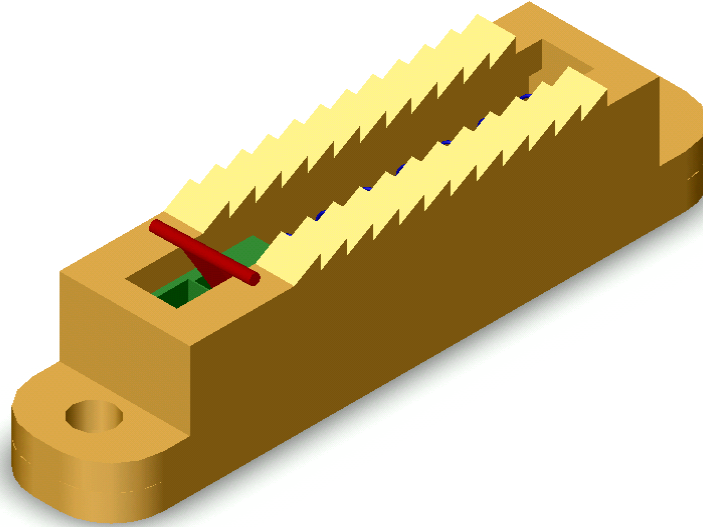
SolidWorks® Assembly of Mechanical Accelerometer Design
